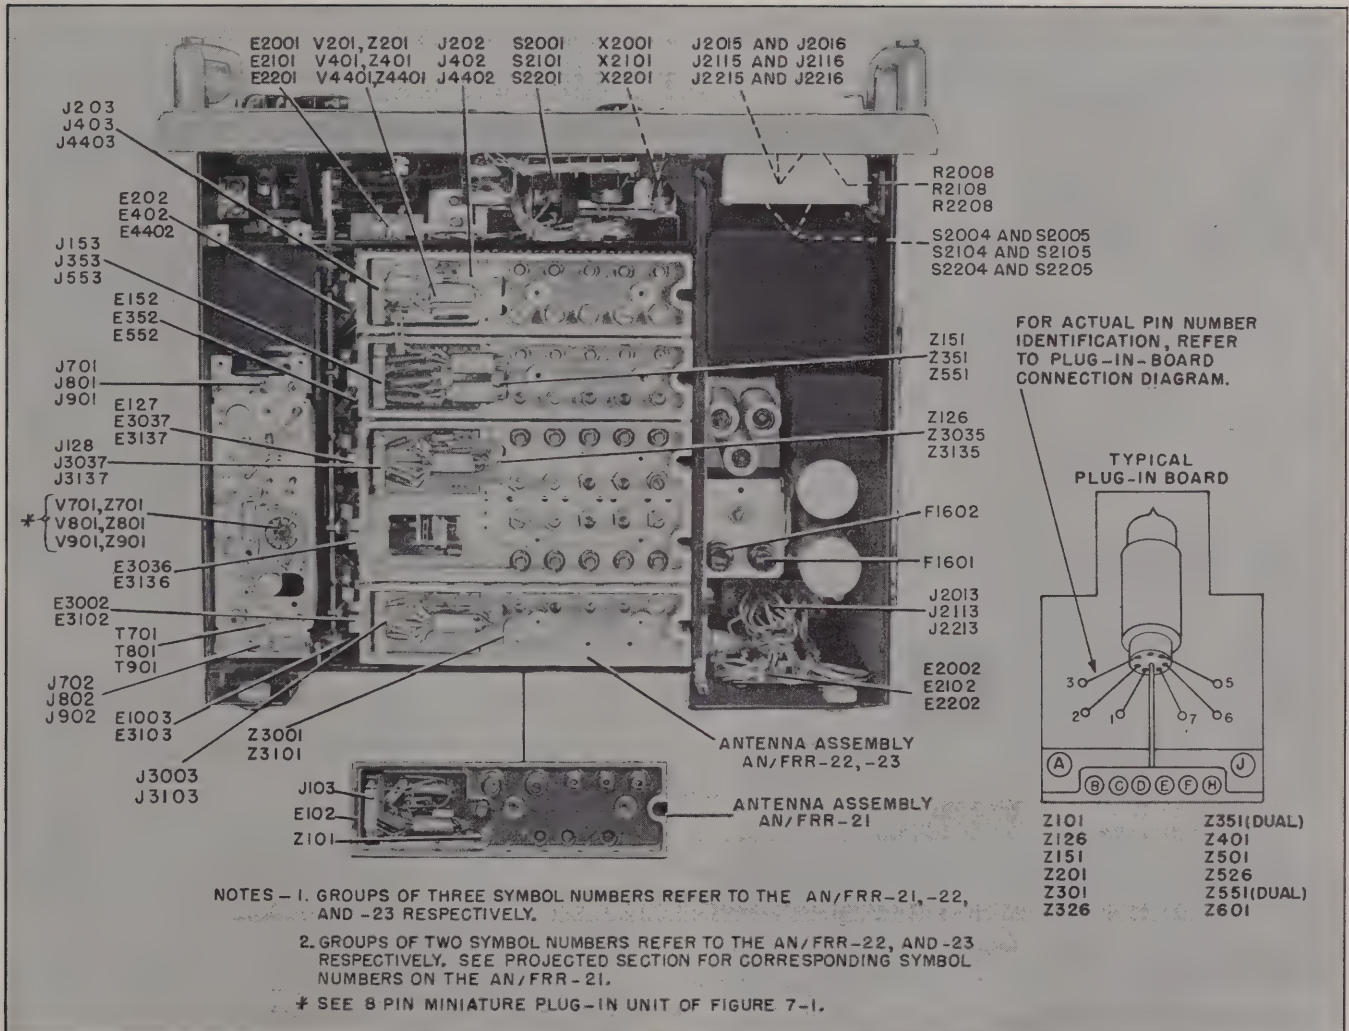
Stage Gain and Trouble Shooting Measurement Points, Bottom View
